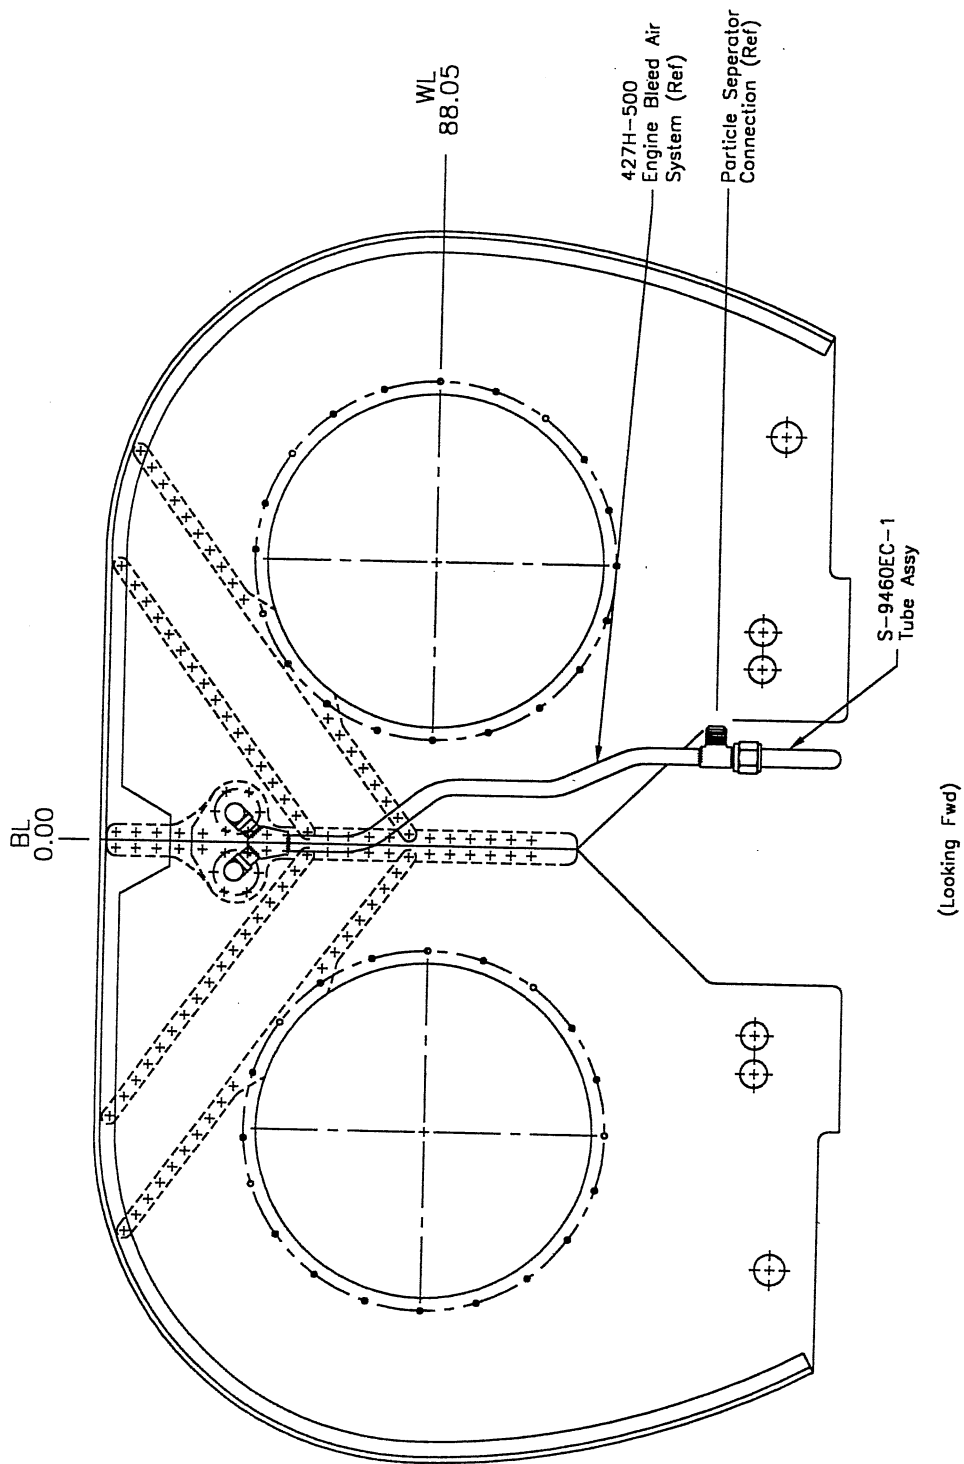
, S-9460EC-1 Tube from the Engine Bleed System.
